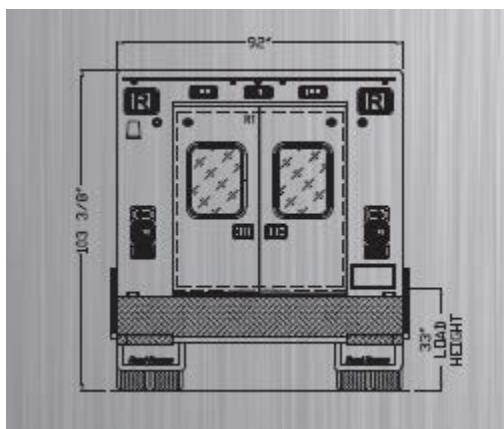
Duramedic Chevrolet UltraLight Rear Dimensions
